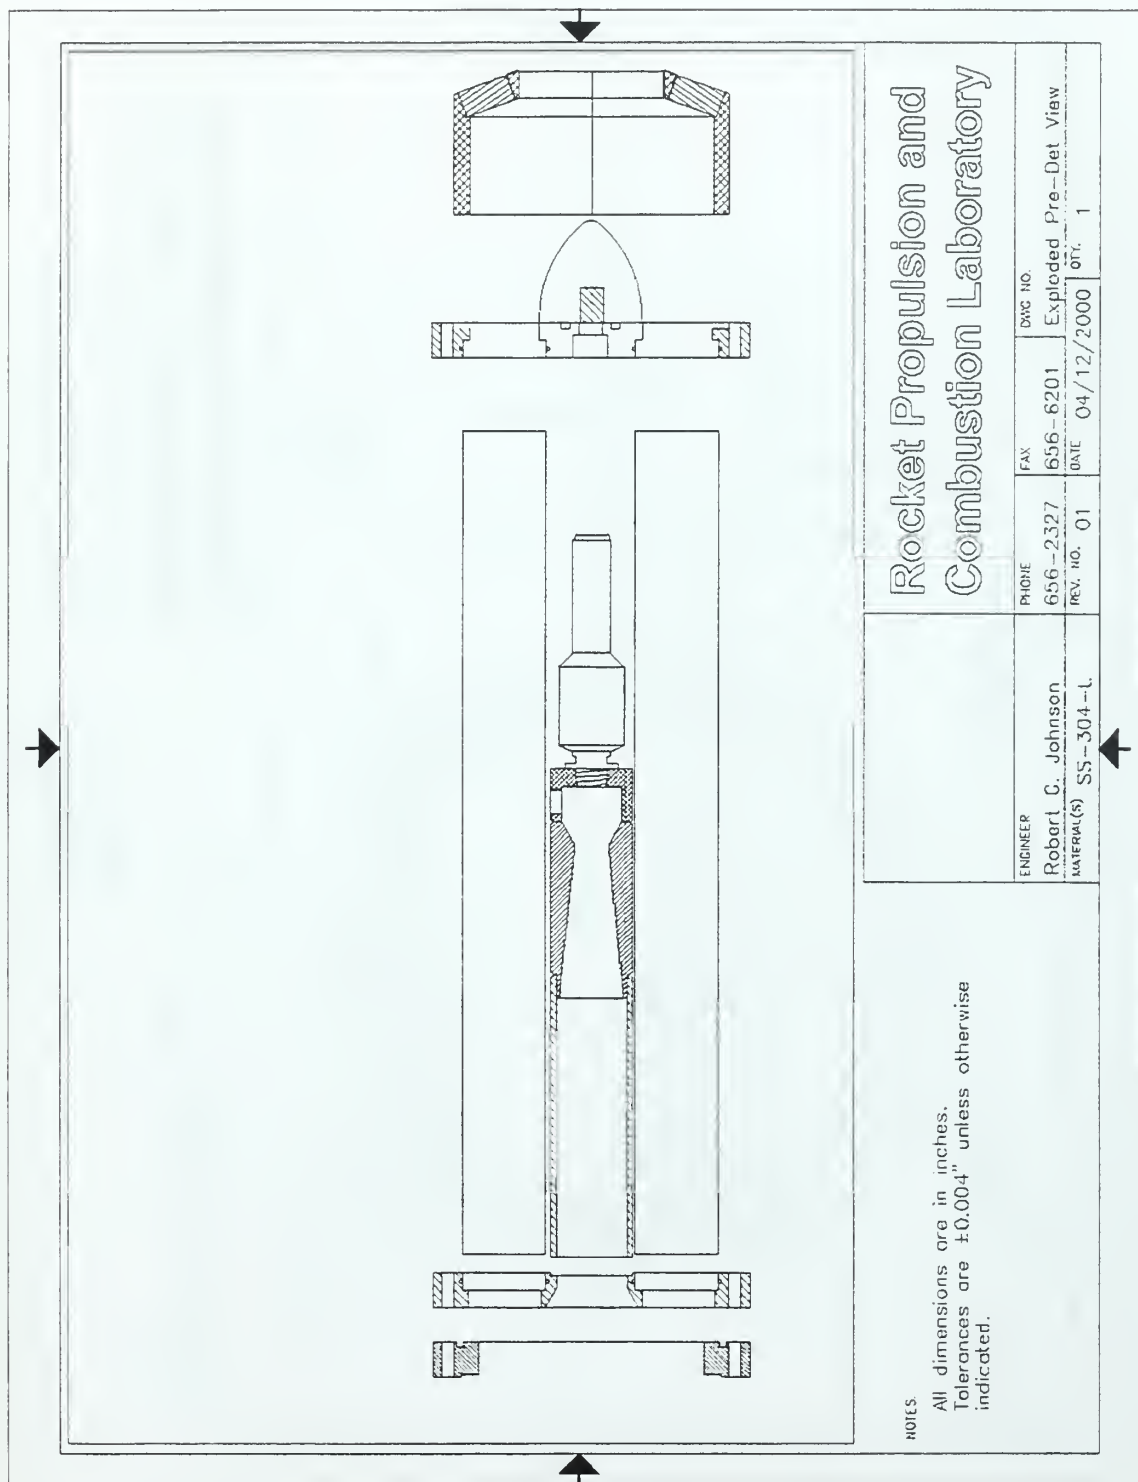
This drawing depicts an exploded view of the manifold section extending from the fuel injection manifold to the main combustion tube.
